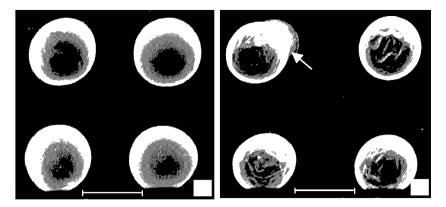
Surface appearance of solder bump formed by (a) laser reflow soldering (b) hot air reflow soldering
